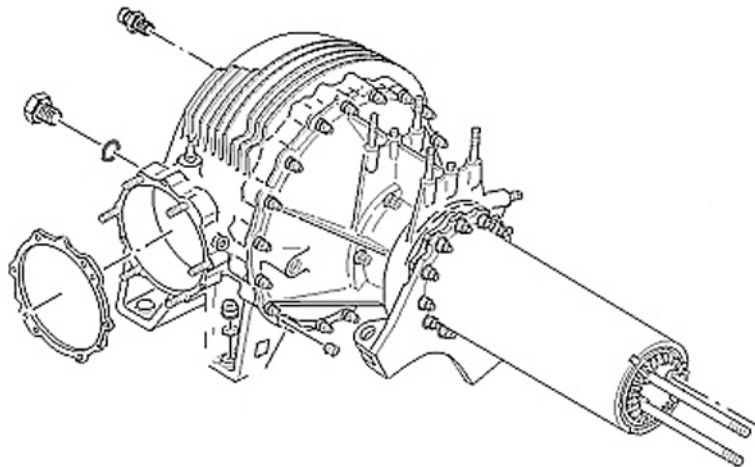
Tail Rotor Gearbox (AH-64A/D)
